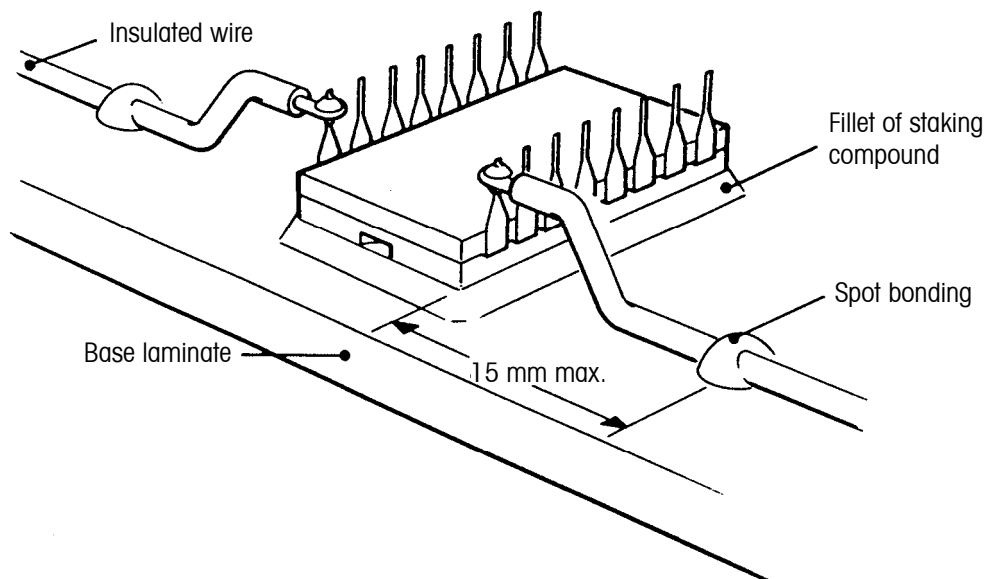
Upside down mounting and wiring of additional side-brazed DIL component (on reverse side or on component side of board) using staking compound
